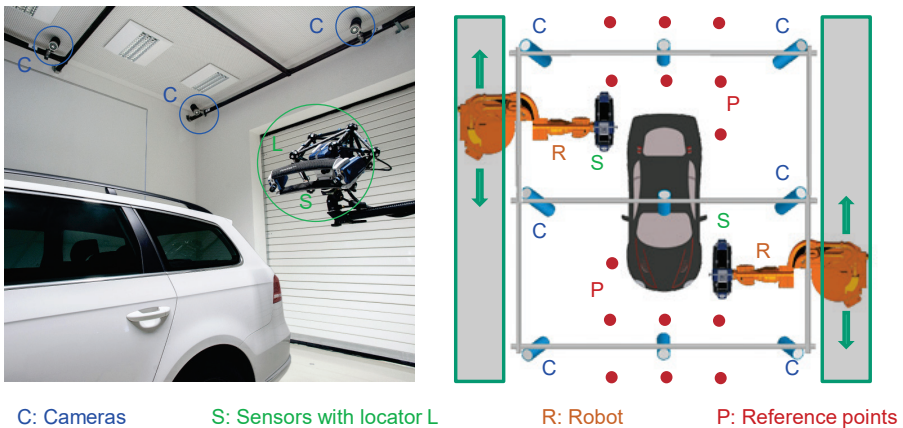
Surface sensor mounted on a robot arm (Hexagon 3D Arena).
